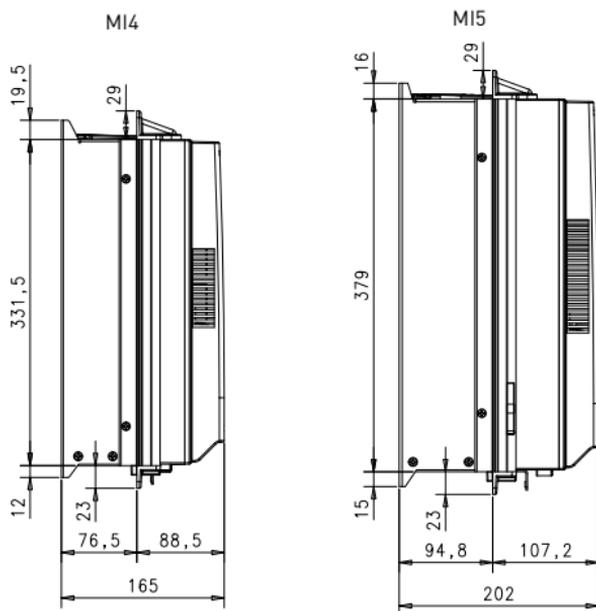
Flange mounting depth dimensions for MI4 and MI5 (Unit: mm)
